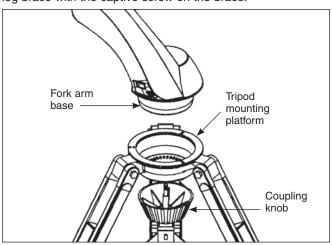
The fork arm attaches to the tripod mounting platform with the large coupling knob.
